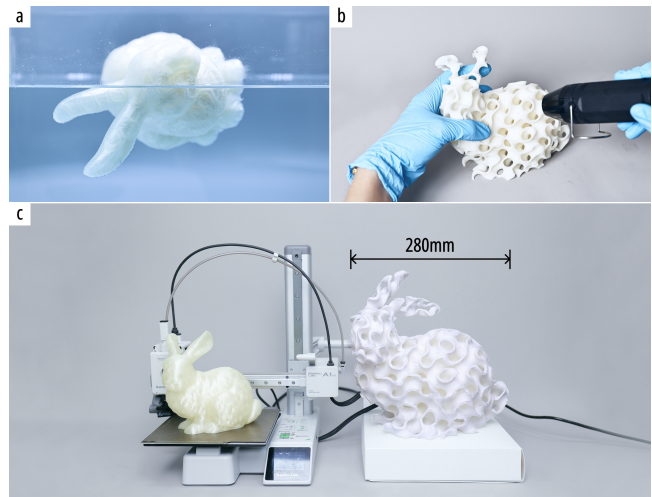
GyFoam bunny: (a) Dissolving the PVA mold; (b) Triggering expansion using a heat gun; (c) Fabricating a large bunny sculpture that exceeds the build volume of the 3D printer used for mold fabrication.
